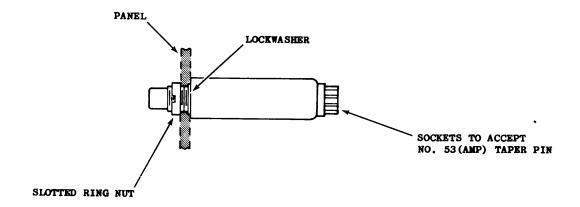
INDICATOR SWITCH LIGHT DRIVER ASSEMBLY
